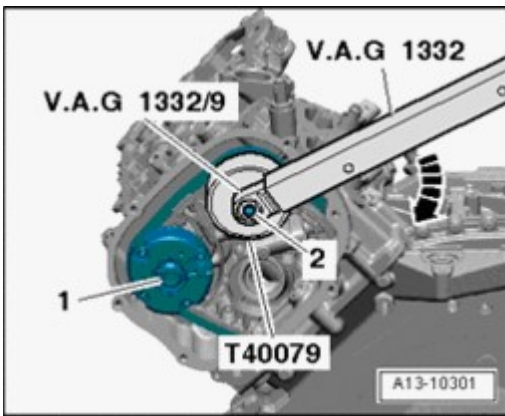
Positioning Adapter T40079 On Intake Camshaft Adjuster At Left Cylinder Head
